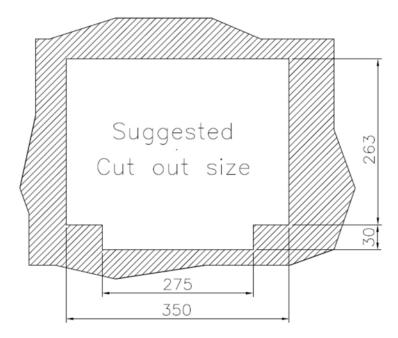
AFL-15B-915 Cutout Dimensions (units in mm)
